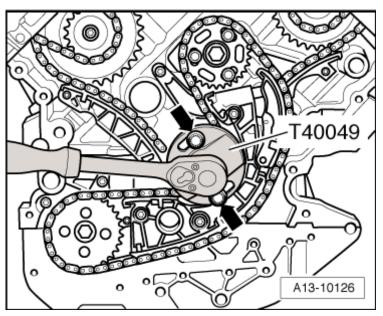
Identifying Key T40049 At Rear On Crankshaft And 2 Old Bolts For Dual-Mass Flywheel
